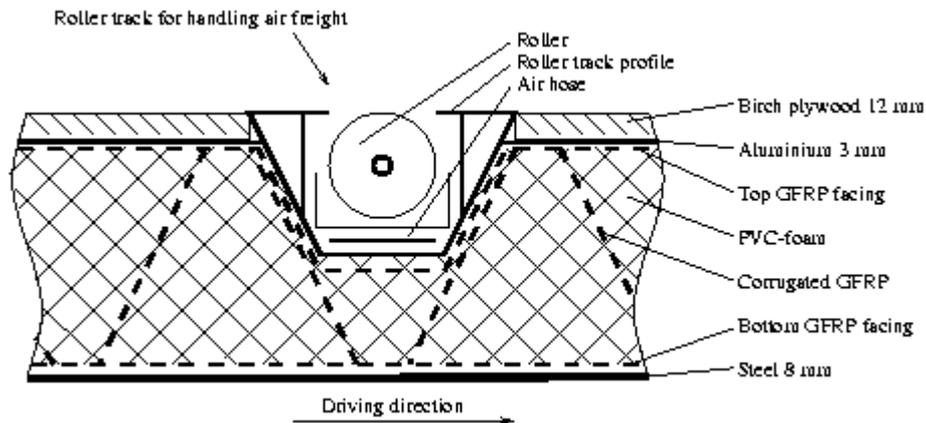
Schematic cross-section of the corrugated GFRP reinforcement of the PVC-foam core at the kingpin section.
